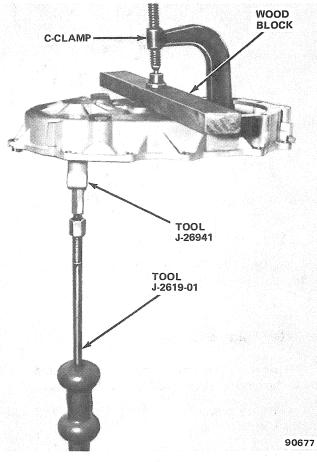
D-29 Front Output Shaft Rear Bearing Removal
